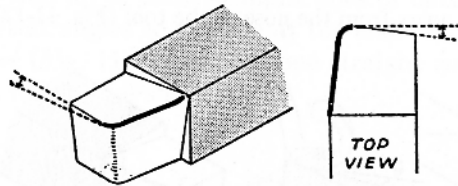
End cutting-edge angle. (The Shell Oil Company)
